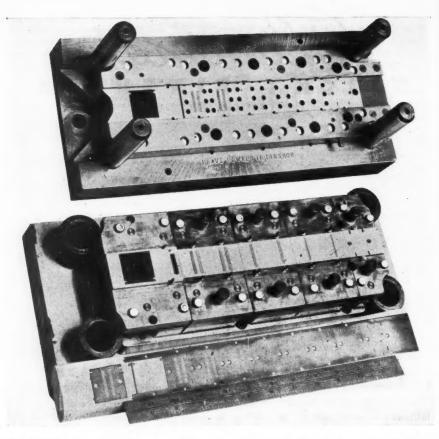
This illustration shows, at top, a four-post progressive die built in five sections; at bottom, the face of the punch holder in which the punches are surrounded by five stripper plates. This die produces dry shaver heads. The scrap strip and blank are shown in the foreground.
